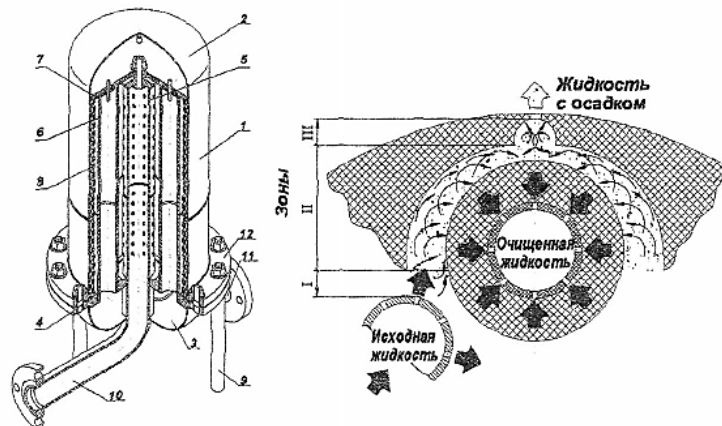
Membrane apparatus with directed flows: three-dimensional model of membrane apparatus with directional flows: 1 - cylindrical shell, 2 - elliptic lid, 3 - elliptical bottom, 4 - filter holder, 5 - perforated distributor, 6 - filter elements, 7 - clamping plate, 8 - a profile element, 9 - supports, 10 - a branch pipe of input of a source liquid, 11 - outlet branch of the filtrate, 12 - flange; principle of operation: I - pressure zone, II - zone of speed conversion, III - zone of meeting of two flows.
